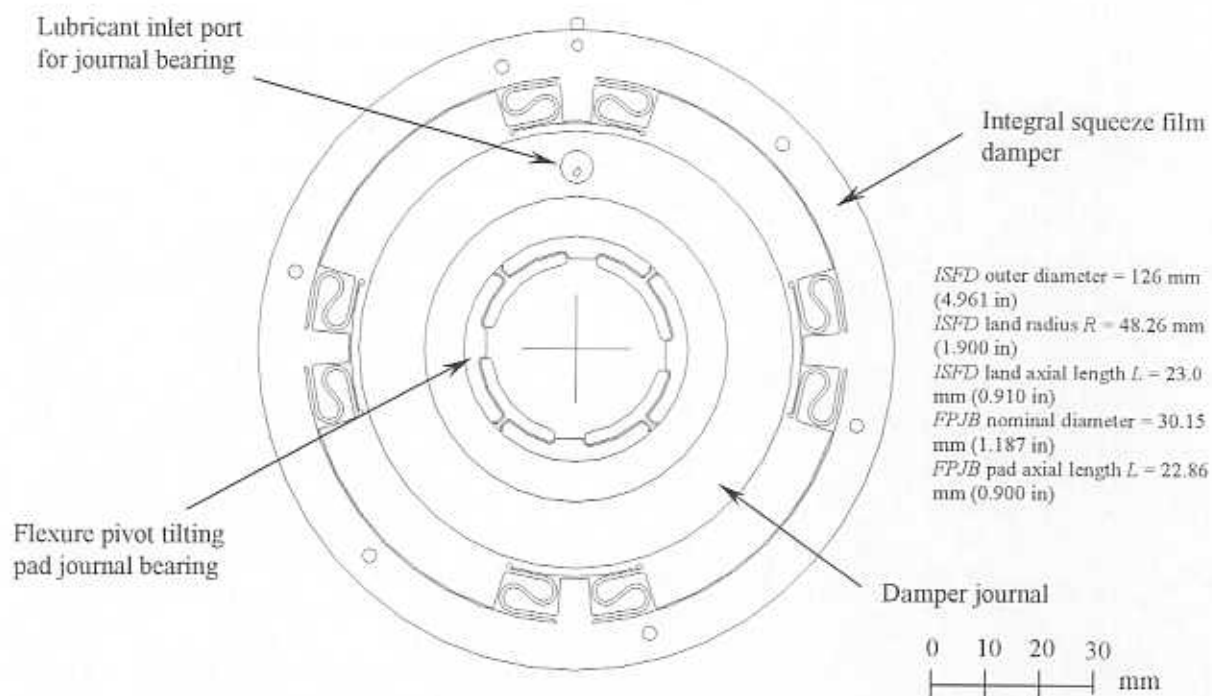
Integral squeeze film damper and flexure pivot tilting pad journal bearing assembly.
